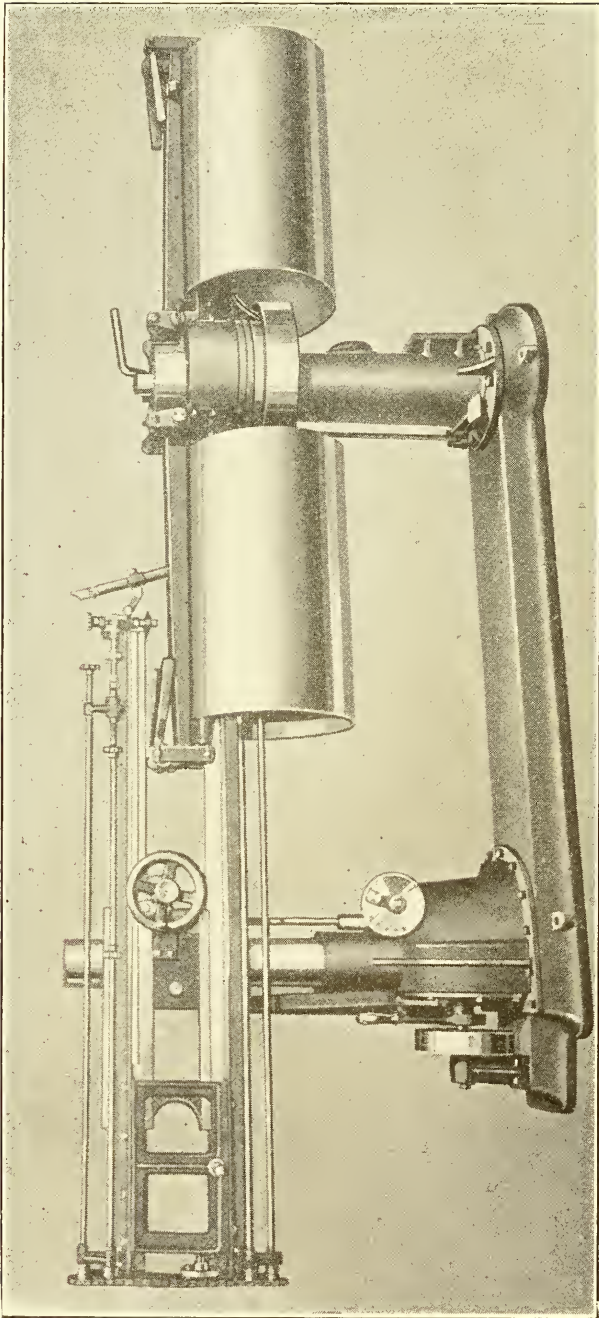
Davis-Bournonville Duograph Welding Machine.
